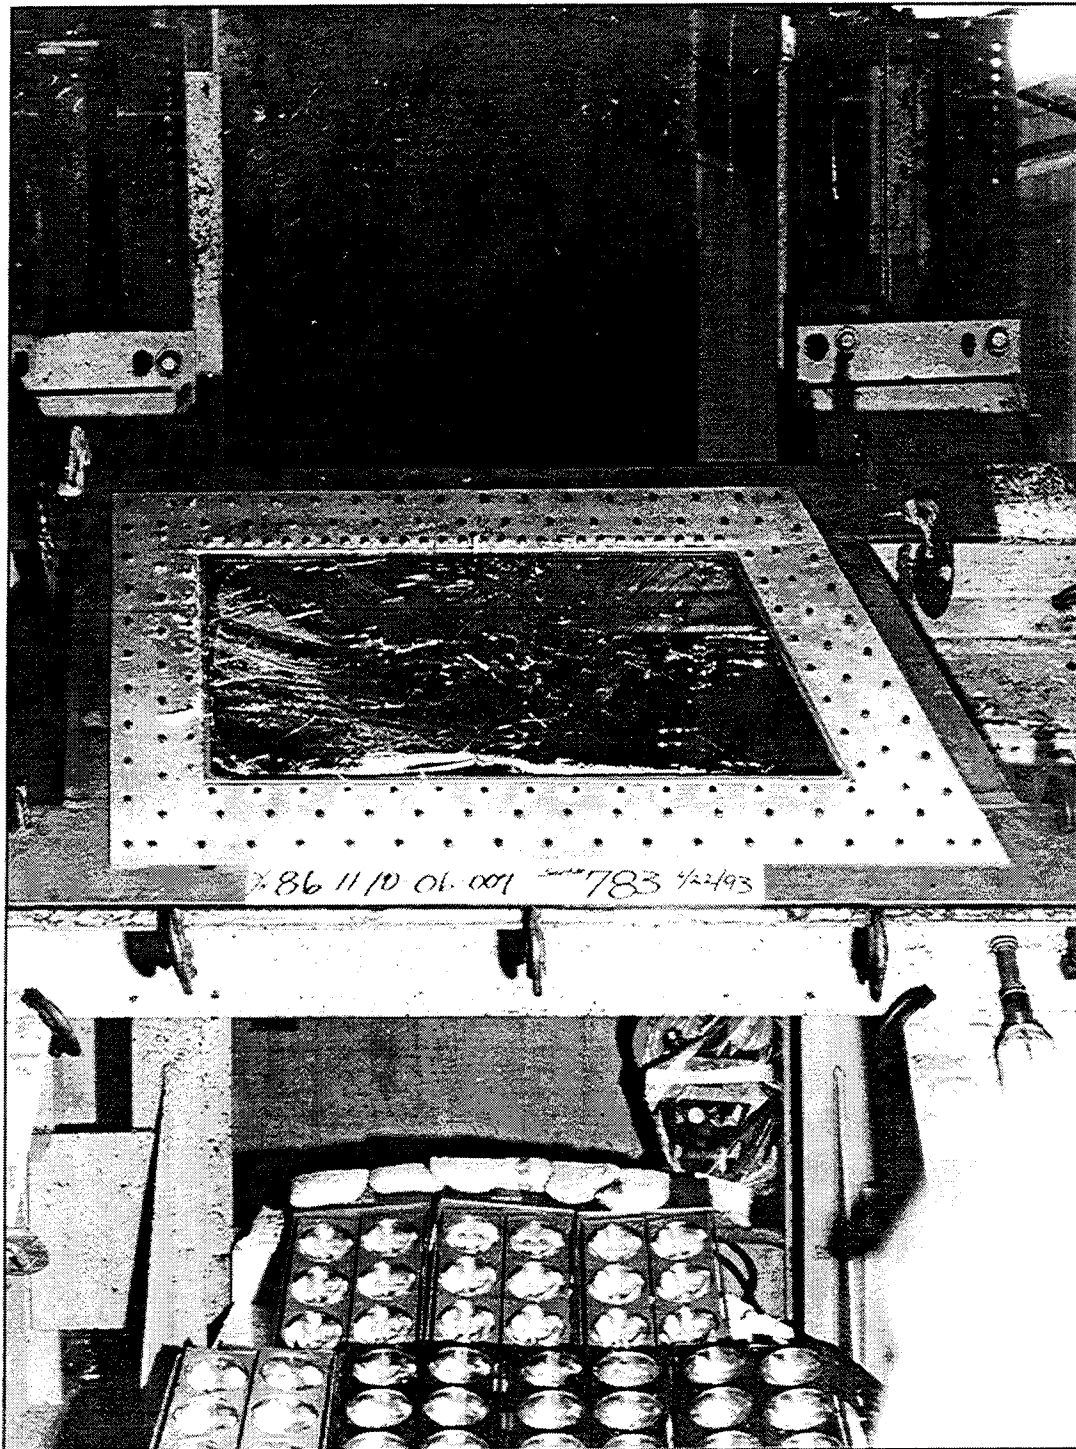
C/KC-135 #1 W/WS Showing Outboard Ply Failure From a 4-Pound Bird Impact at 251.7 Knots, Front View (New W/WS, S/N 86-H-10-06-007)
